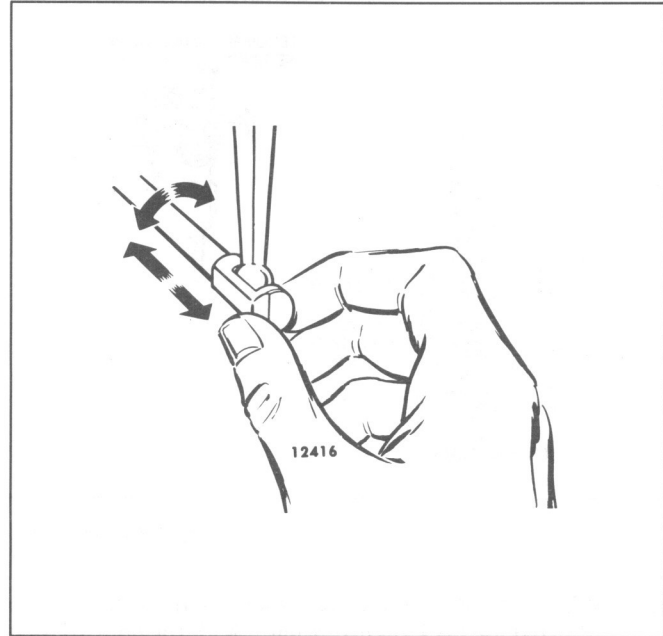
Checking Rotating Movement of Injector Control Rack
